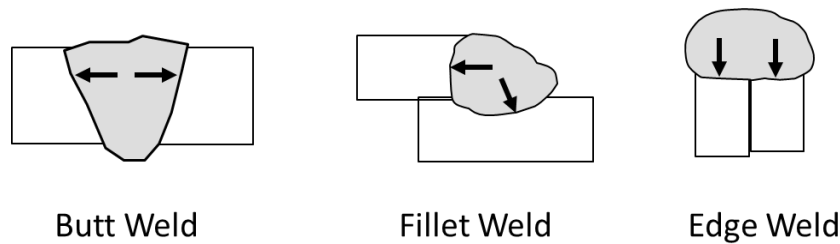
Schematics shows contraction direction of the fusion zone when the parts are anchored and unable to move. Butt weld produces maximum residual tensile stress and edge produce no residual tensile stress; fillet weld is in between.
